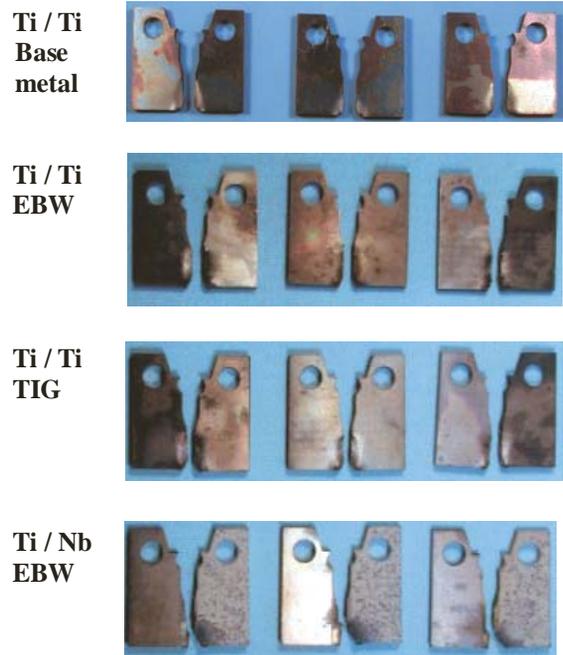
Fractured test specimens of Ti base metal (Class 2) and weld joints (Ti/Ti EBW, Ti/Ti TIG, Ti/Nb EBW).
